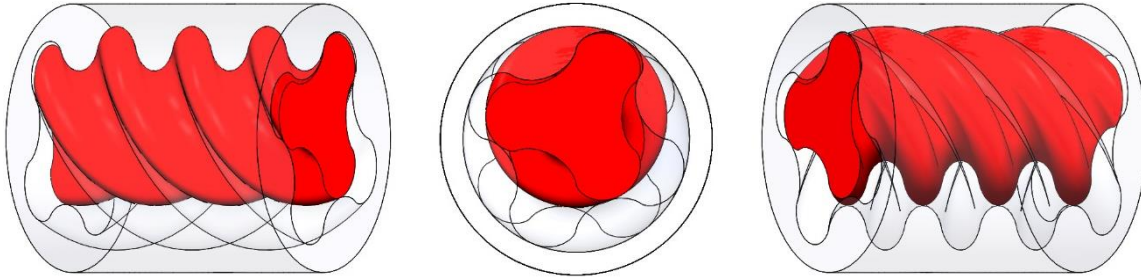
Views of an internally geared configuration with 3 lobes on inner rotor illustrating contact lines between the inner rotor (red) and the outer rotor (transparent) and the resulting working chambers
